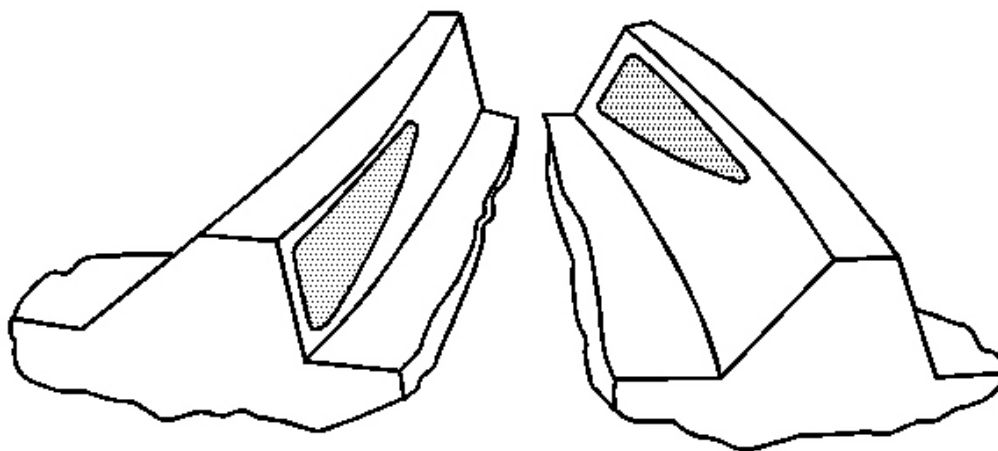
Identifying Drive Side Heel - Coast Side Toe Contact Pattern
